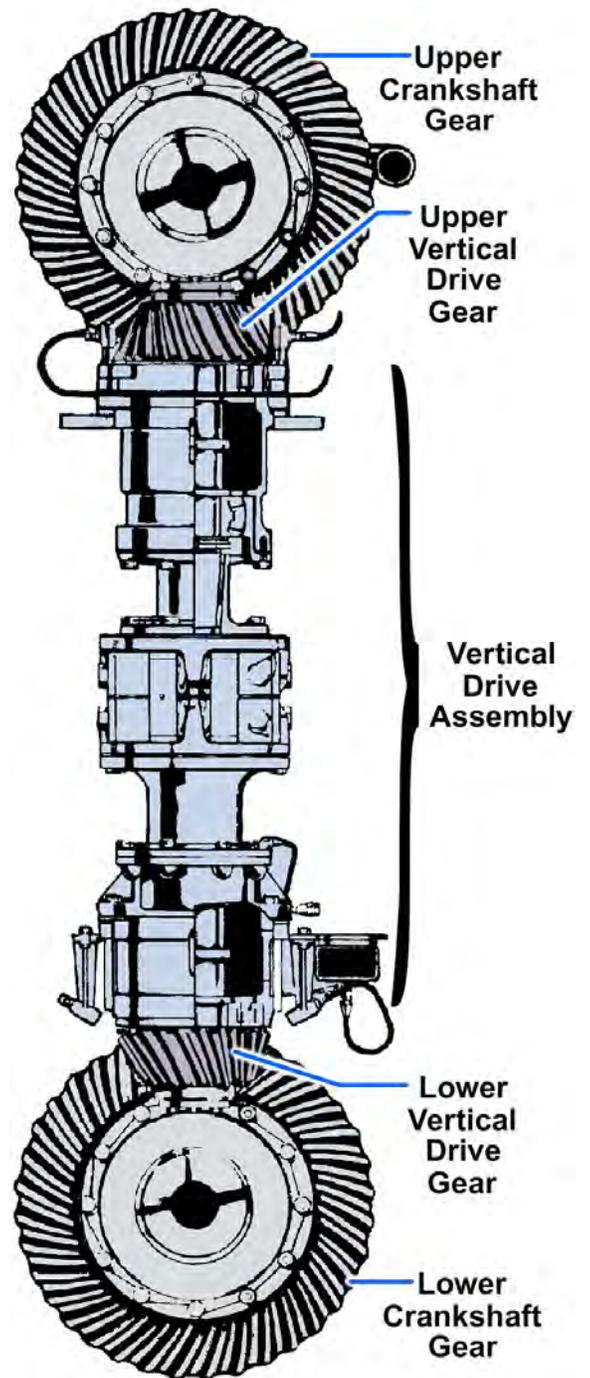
Vertical drive assembly in a opposed-piston engine.
